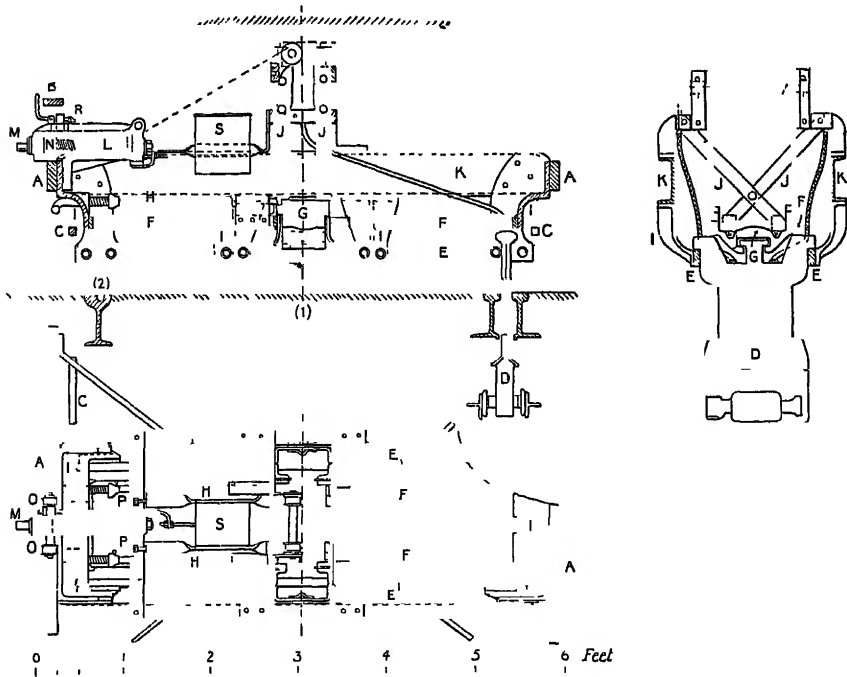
Plough, with Raising and Lowering Device, Paris
